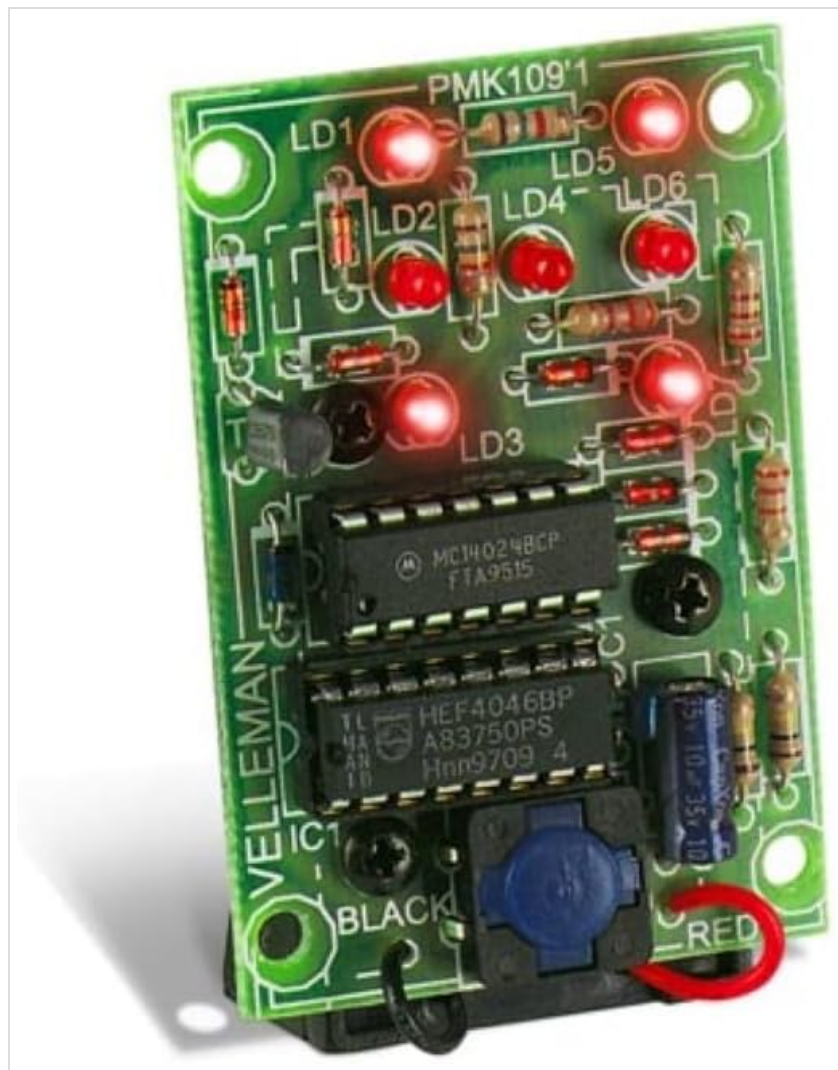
A fully assembled Whadda WSG113 Electronic Dice circuit board, showcasing the soldered components and illuminated LEDs. This represents the final appearance of the kit after successful assembly.
